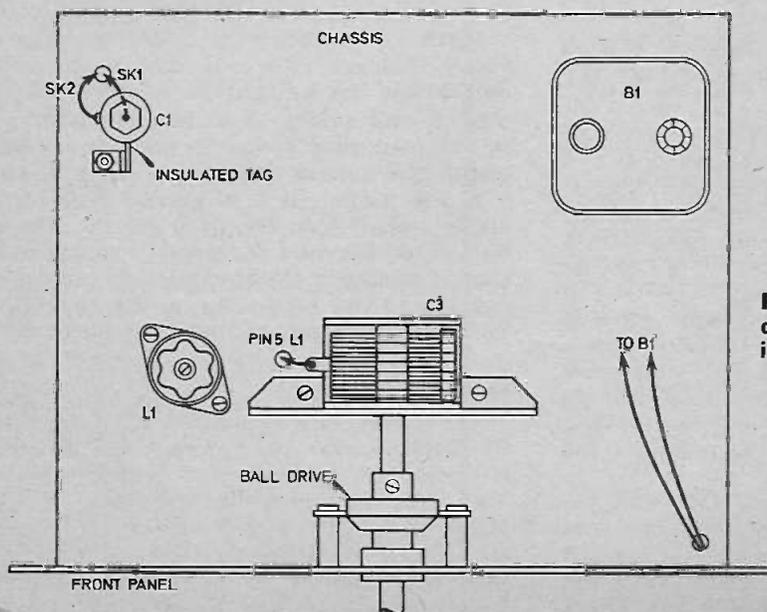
Showing the positioning of the components and mounting for C3 on top of the chassis.
